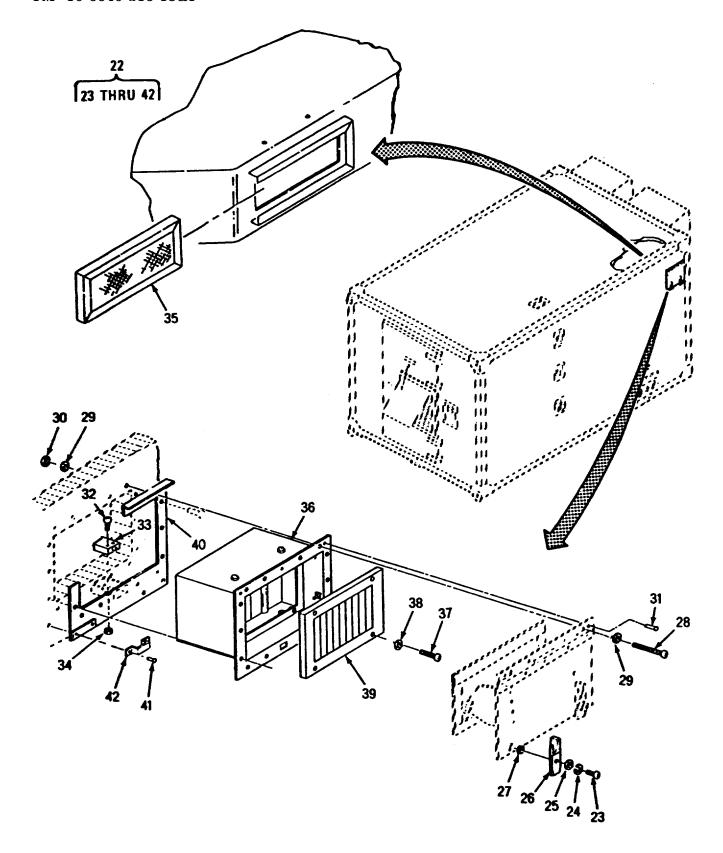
Purge System Port Doors and Limit Switches, Right Hand (Sheet 2 of 2)
